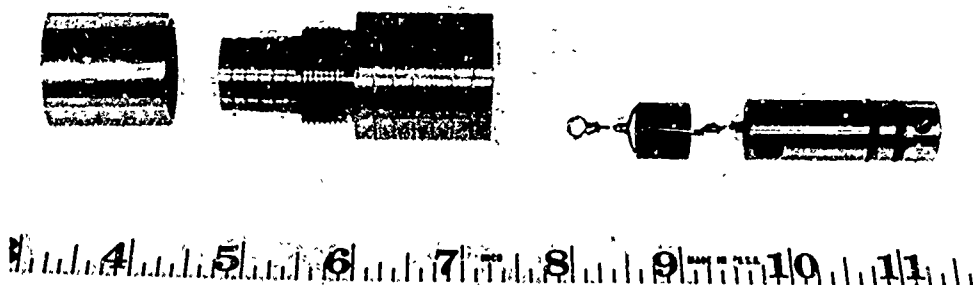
Bottom end fitting with compression nut and line termination showing insulator and O-ring seals.
